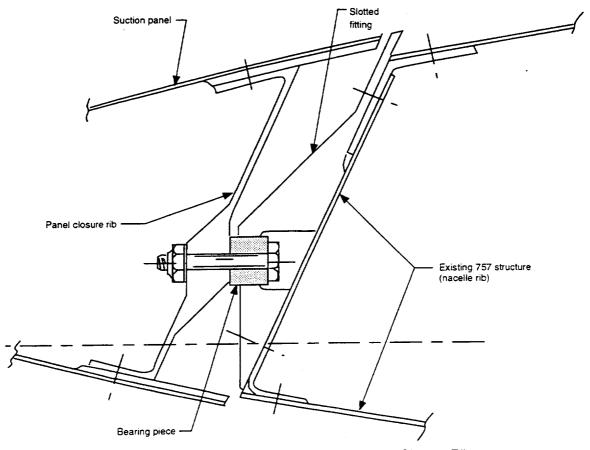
Section Through Inboard Panel Closure Rib
